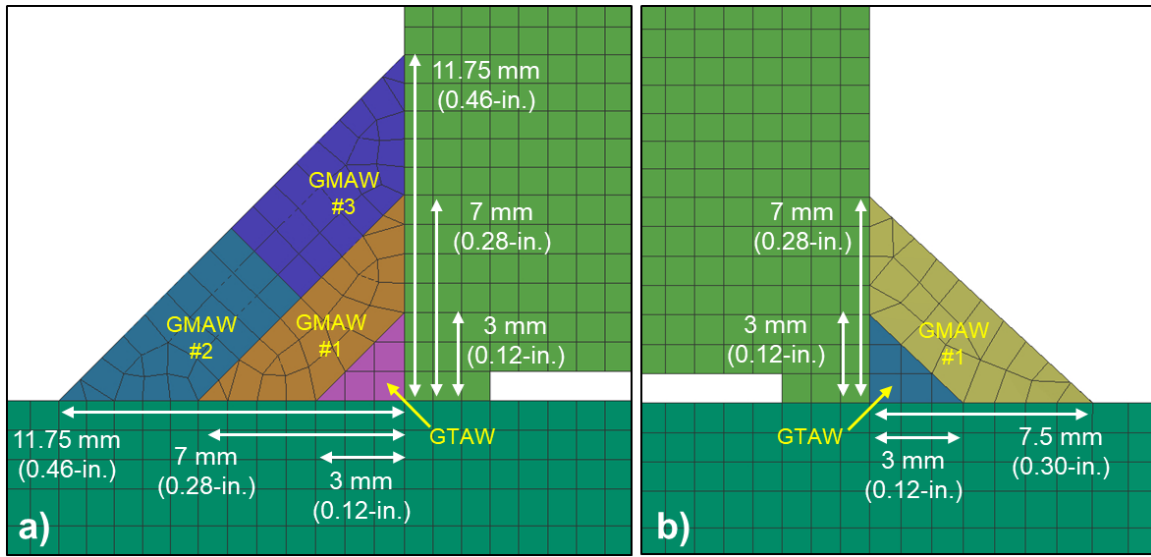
Weld passes showing the bead sizing and bead sequence for the a) longitudinal and b) transverse joints.
